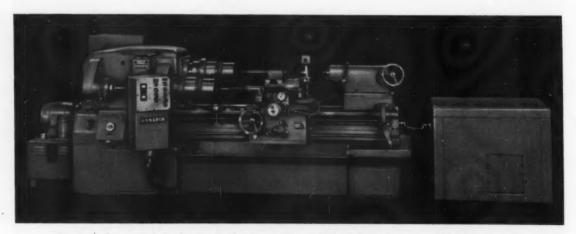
Profile-tracer lathe for noncircular cross-section work brought out by Monarch Machine Tool Co.
